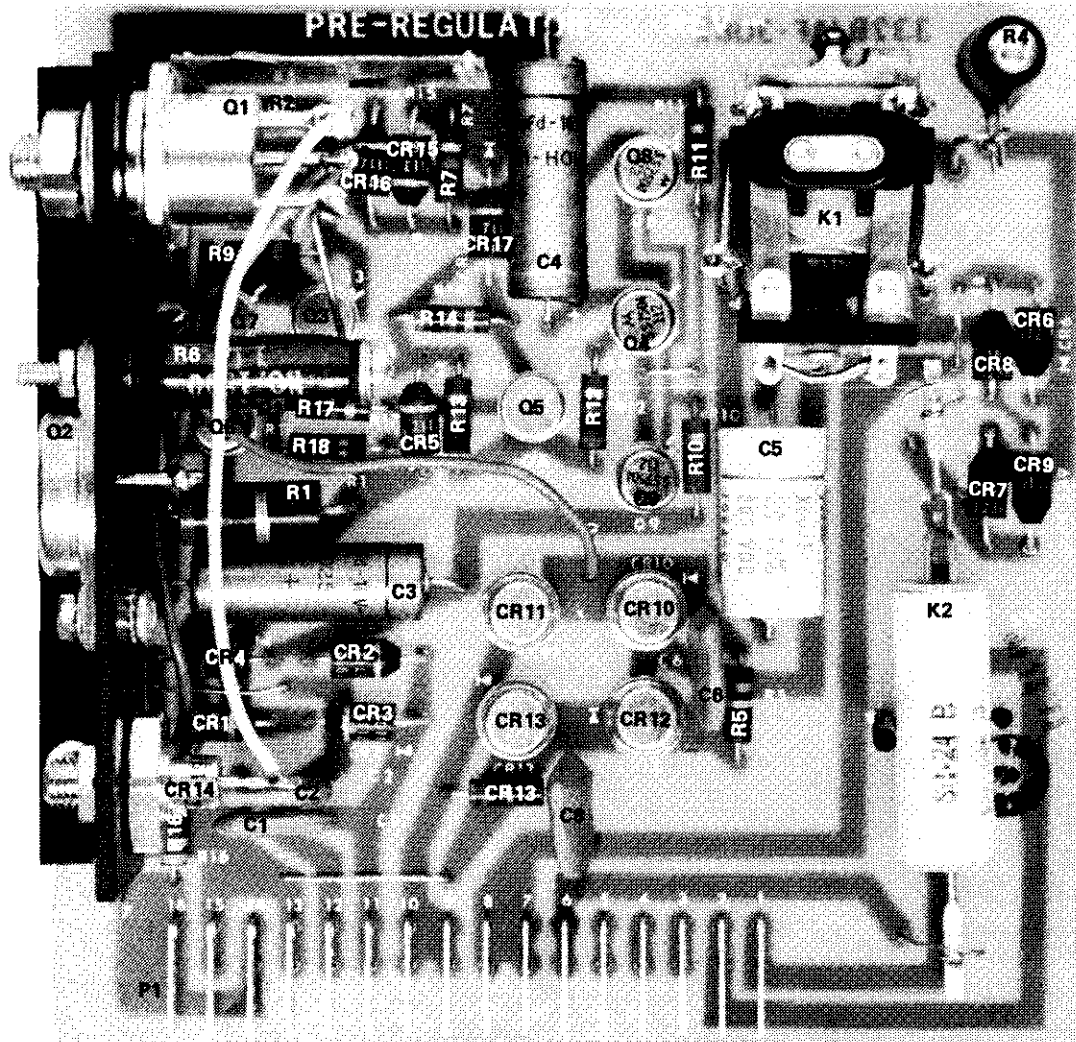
PREREGULATOR PRINTED CIRCUIT ASSEMBLY
